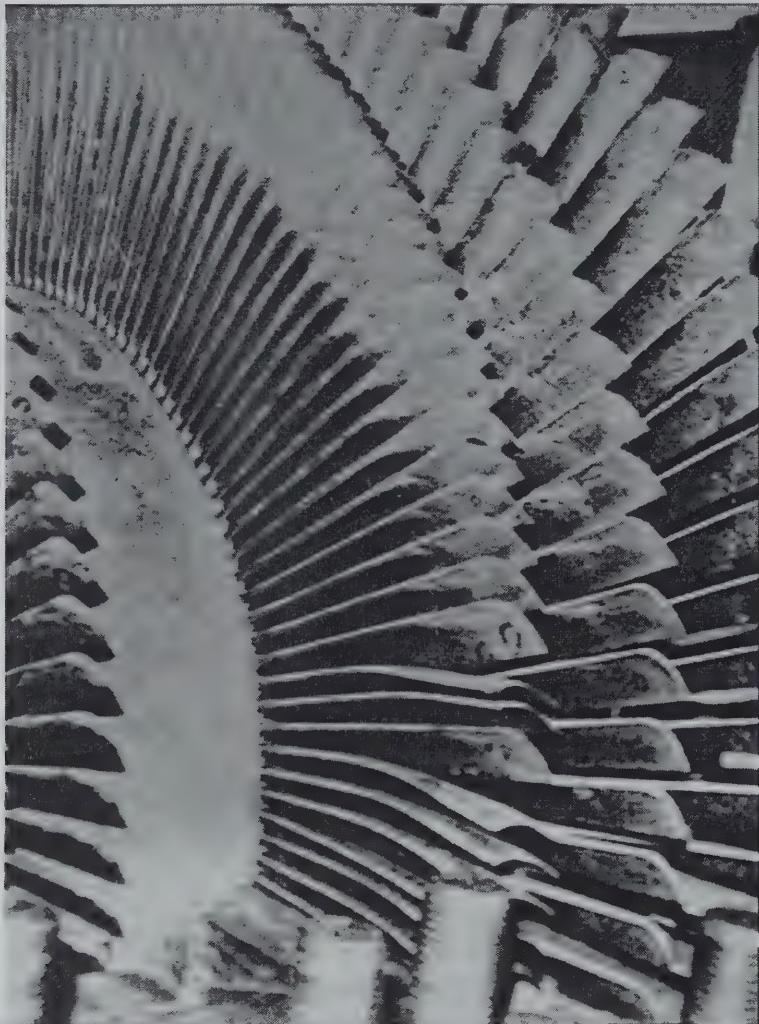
A small steam turbine was severely damage when axial loads caused the moving and fixed blades to interact.
